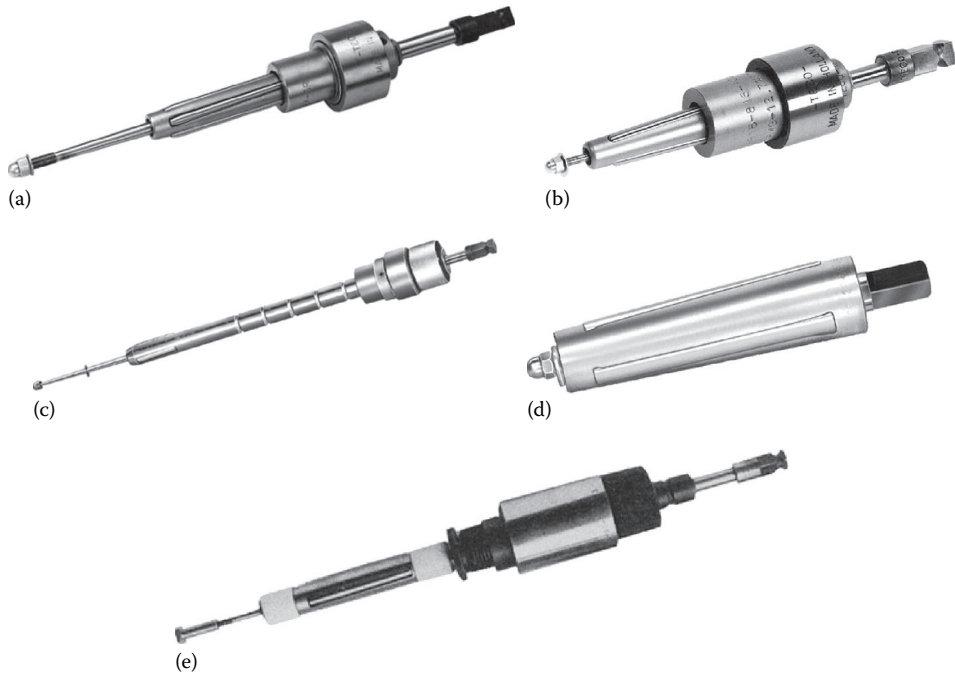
Tube expanders. (a) Five roll tube expander, (b) TACK rolling tube expander (conical expander), (c) step-by-step tube expander for thick tubesheet, (d) tube expander for thin tubesheet, and (e) step expander designed to avoid destructive axial stress in welded joints. (Courtesy of Teco Tube Expanders Company, Leiderdorp, the Netherlands.)
